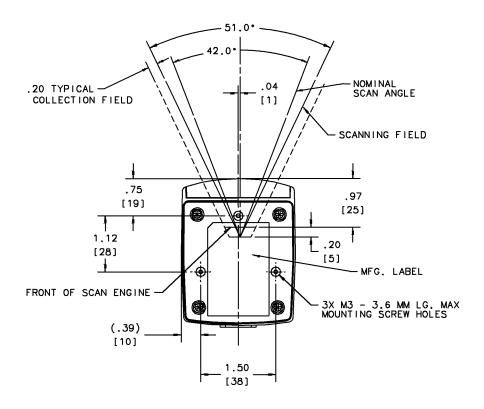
Symbol MS1204FZY Mechanical Drawing
